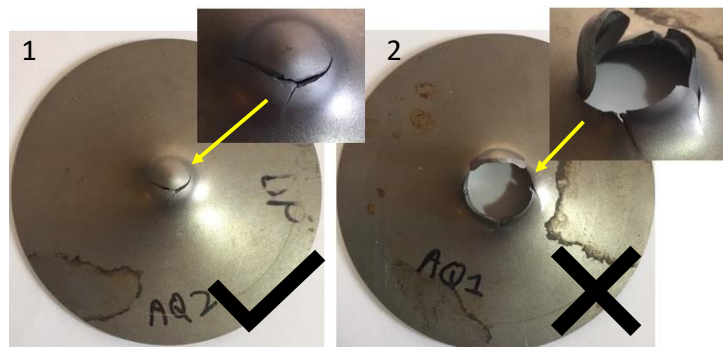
Example of the recommended size of fracture in (1) with a smaller and controlled fracture and a large catastrophic fracture in (2) which should be prevented for the post-punch test microstructural damage inspection.
